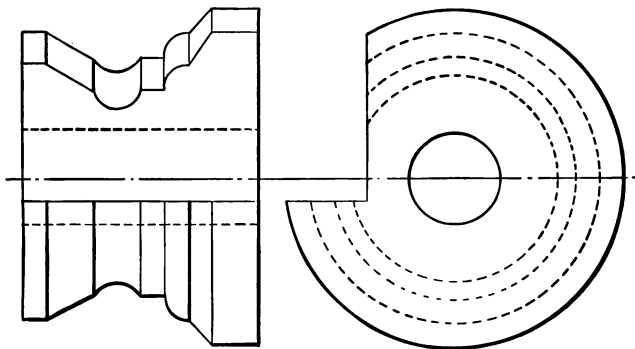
Circular Forming Tool with Clearance for Cutting Edge
